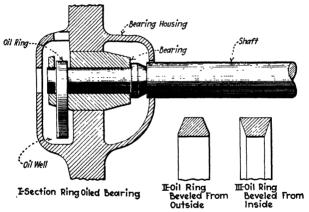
Illustrating a sectional view of a ring oiled bearing, and several types of oil rings. Oil rings which have bevelled sides are always preferable because they do not tend to stick to the sides of the oil-ring slots.
